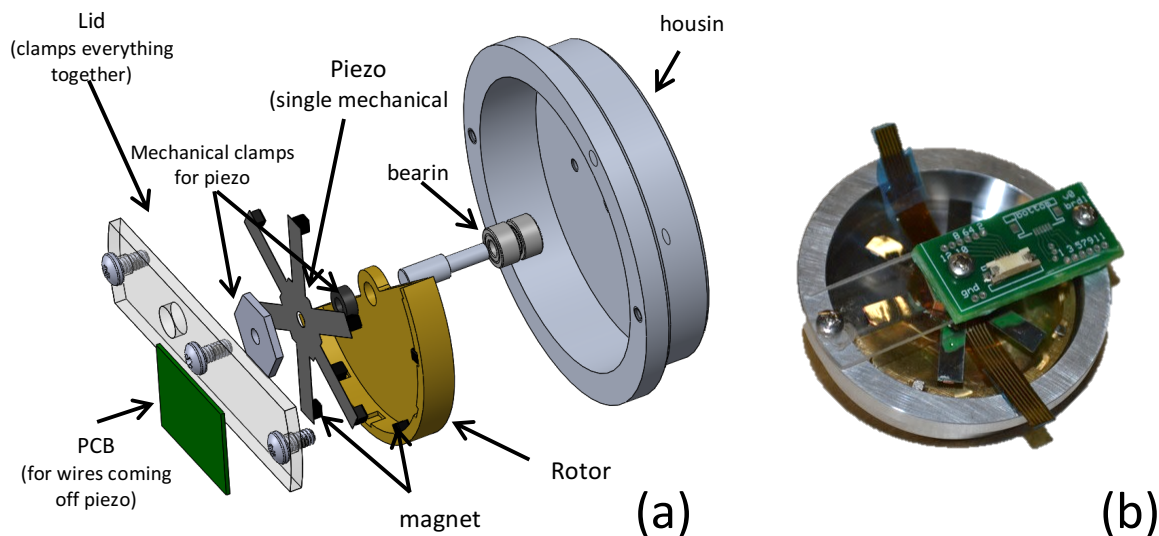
(a) Schematic exploded view with all parts and (b) optical images of assembled Gen-I prototype. [figure provided by Tiancheng Xue]
